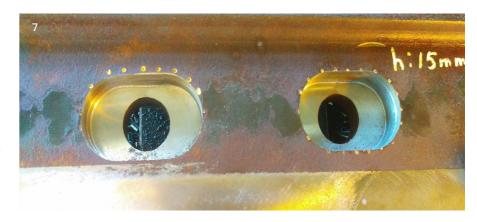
The long hole diameter cutting is completed, with depth 15mm
